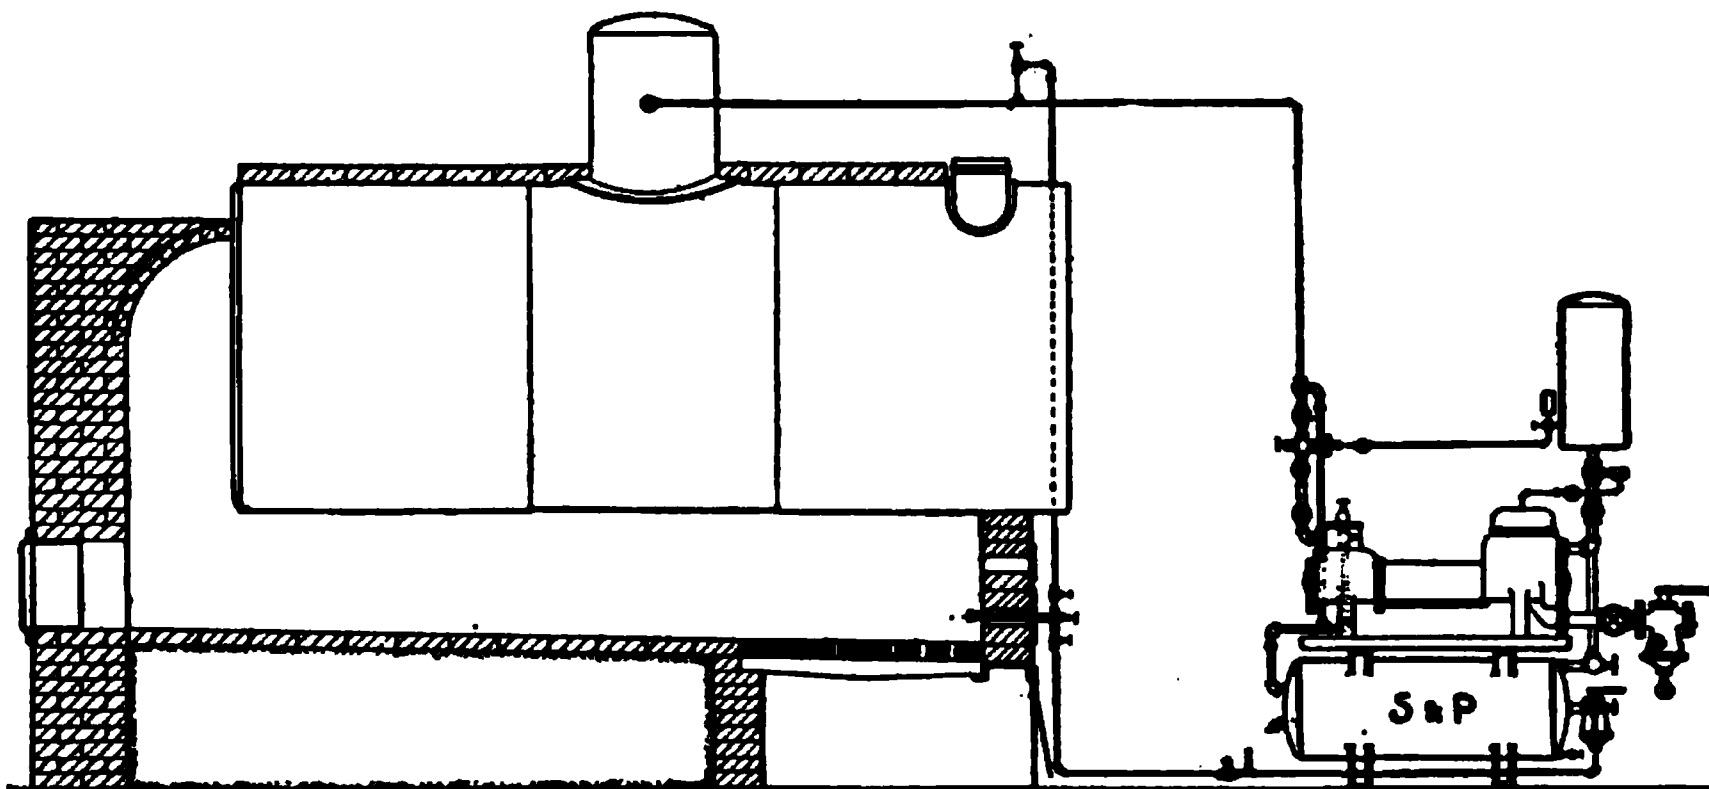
Tubular boiler fitted with Staples & Pfeiffer oil burner system.
